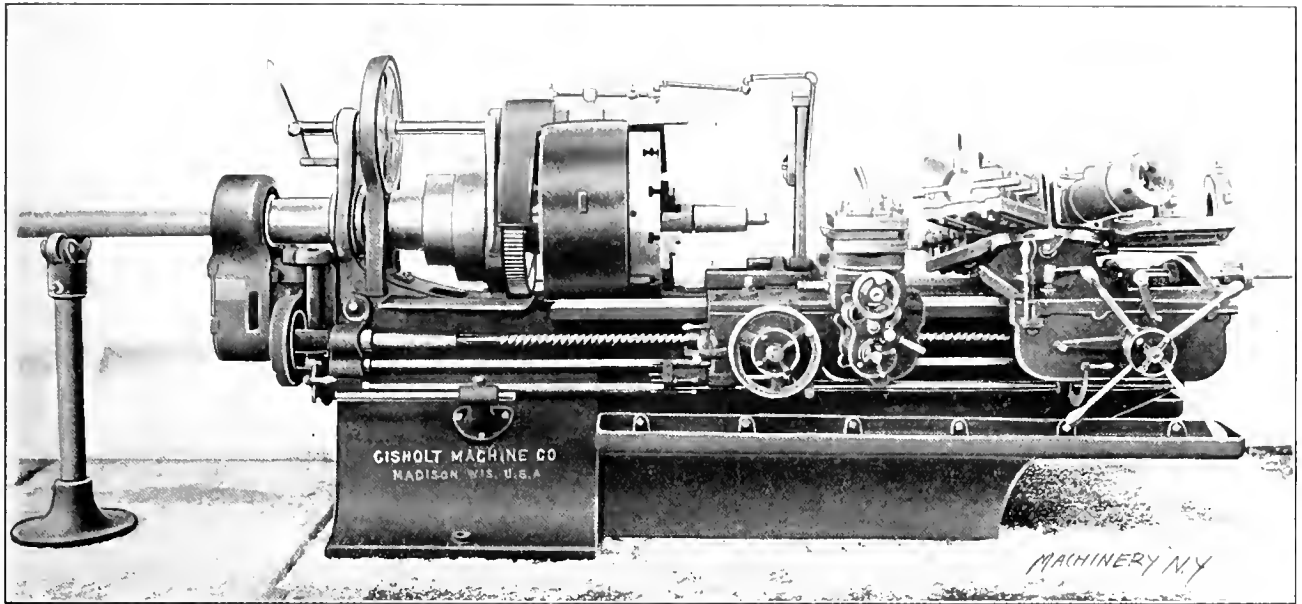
Gisholt Turret Lathe arranged for Railway Shop Work; shown set up for Finishing Cross-head Pins.
